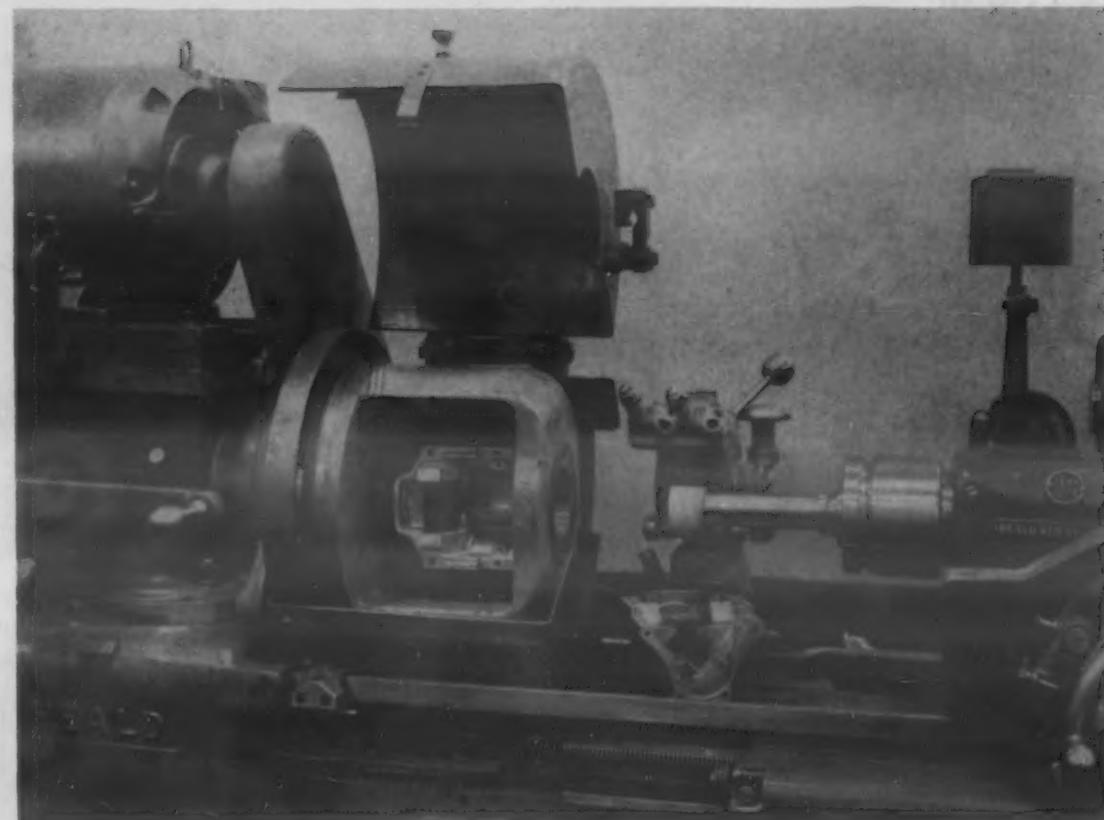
Internal grinding set up for finishing the bore in an aircraft magneto housing. (Courtesy: Heald Machine Co.)
